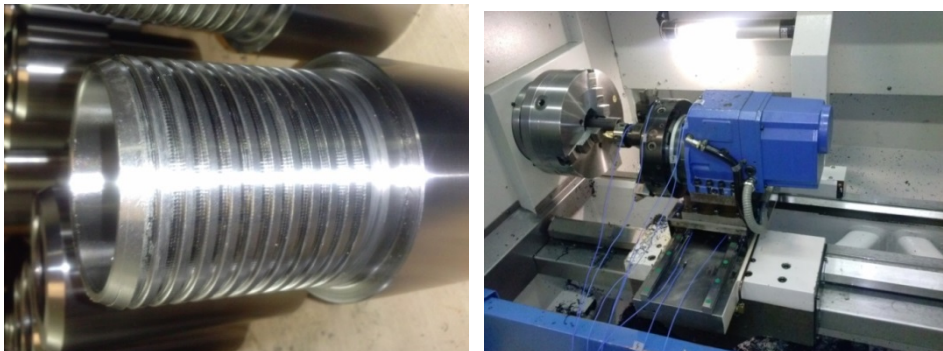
a) Path of thread milling in unstable conditions; b) The general view of the machine with mounted sensors
